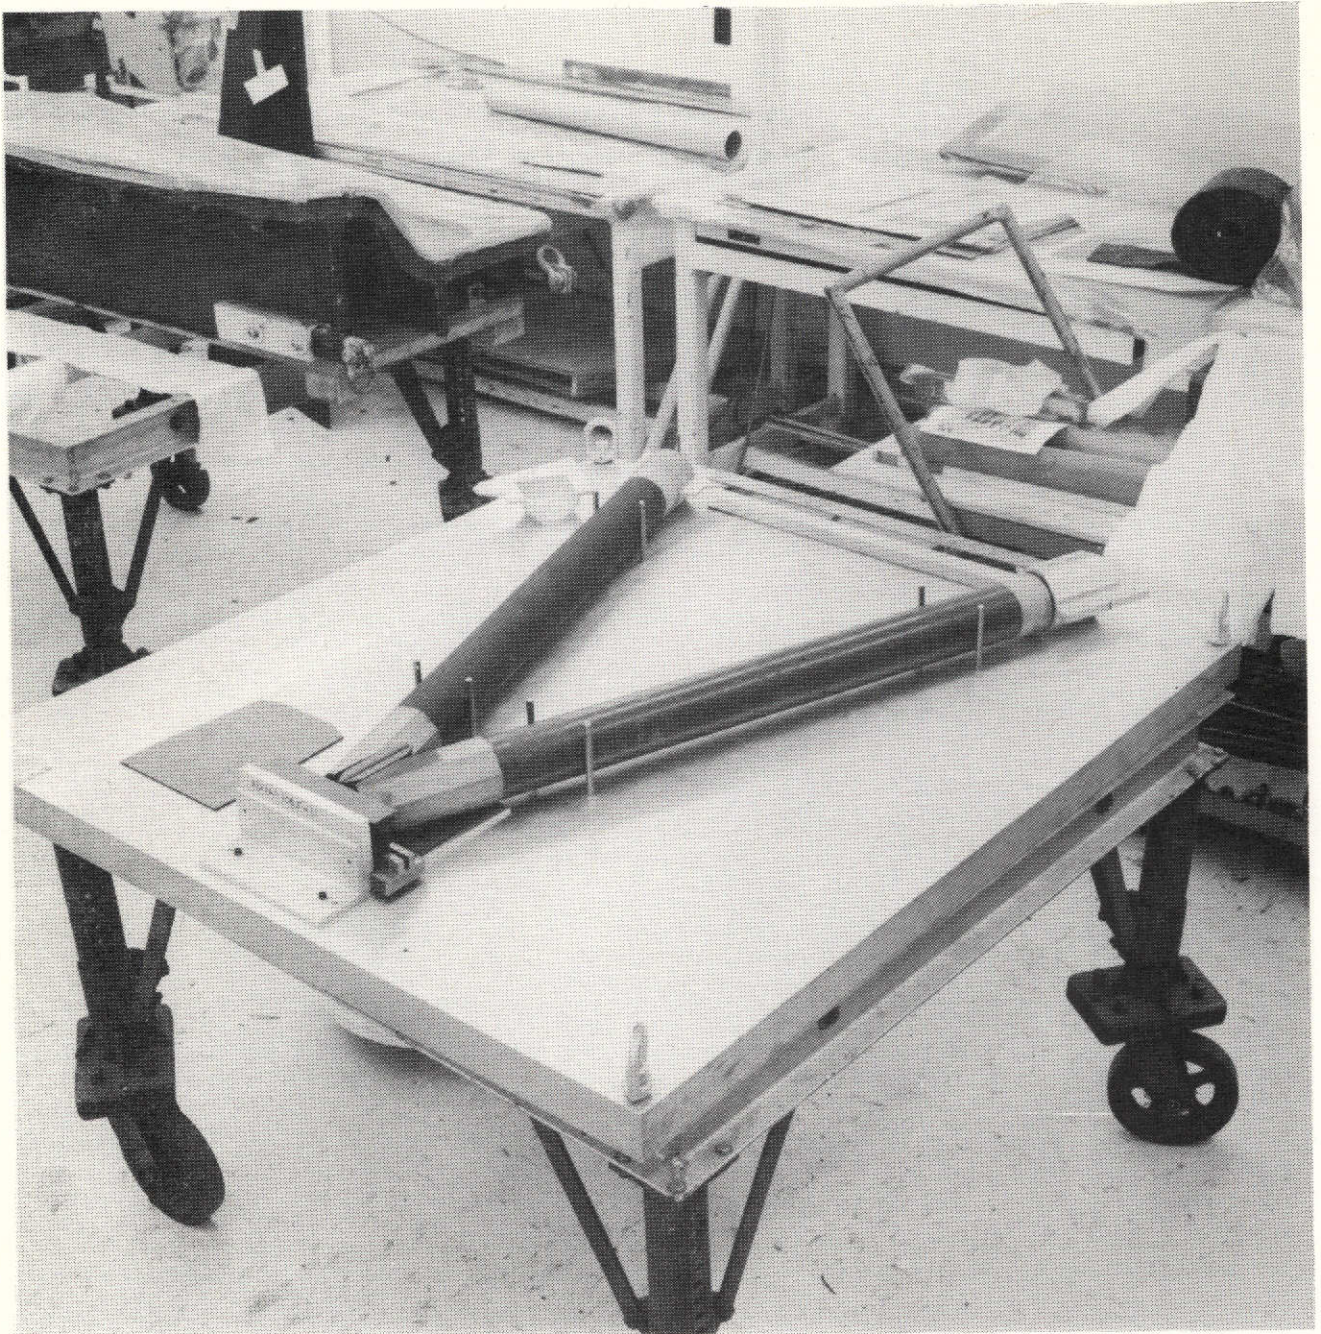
Details Pre-Fit-Two Member Truss Assembly
